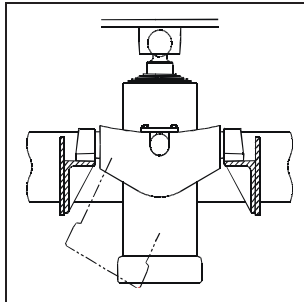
ALTERNATE CROSS MEMBER PROFILE FOR ROTATIONAL CLEARANCE
